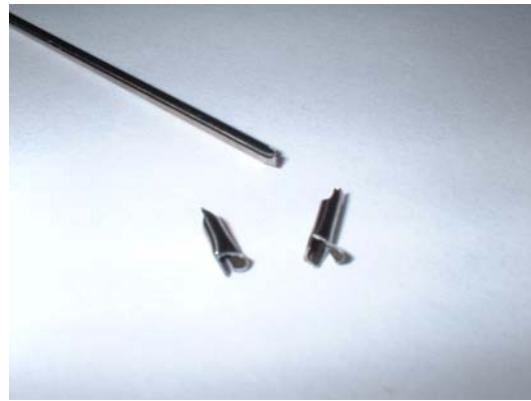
Attempts at cutting SMA tubing resulted in irreversible damage
